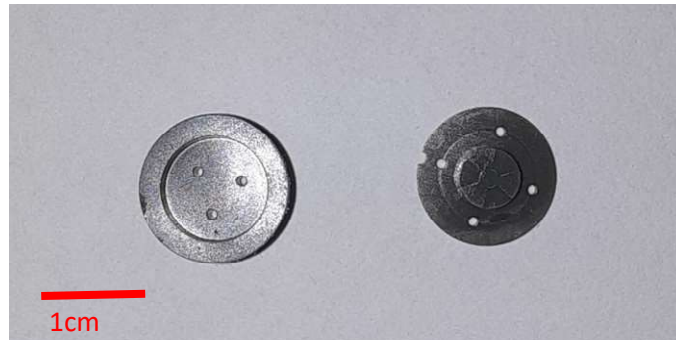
Mold for hand-like device fabrication. The mold with three holes can be seen on the left and the mold cover can be seen on the right. The Mold cover is responsible for forming the membrane and the void of the hand-like structure.
